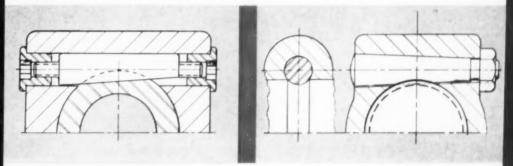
The body of the bolt illustrated in this sketch is cut off at an angle.
